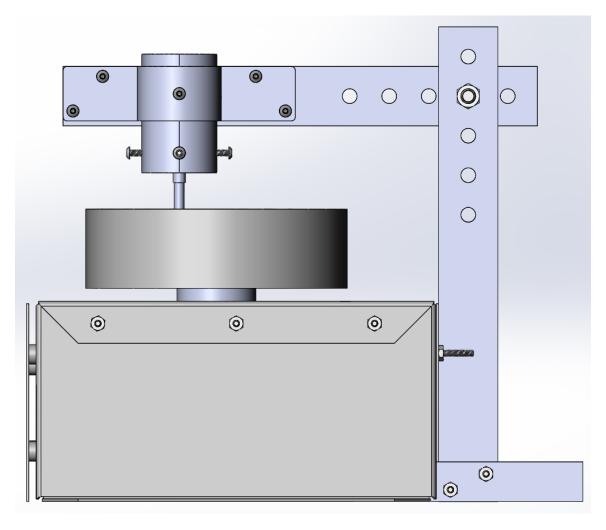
Additional View of Pin-on-Disk Assembly CAD.
